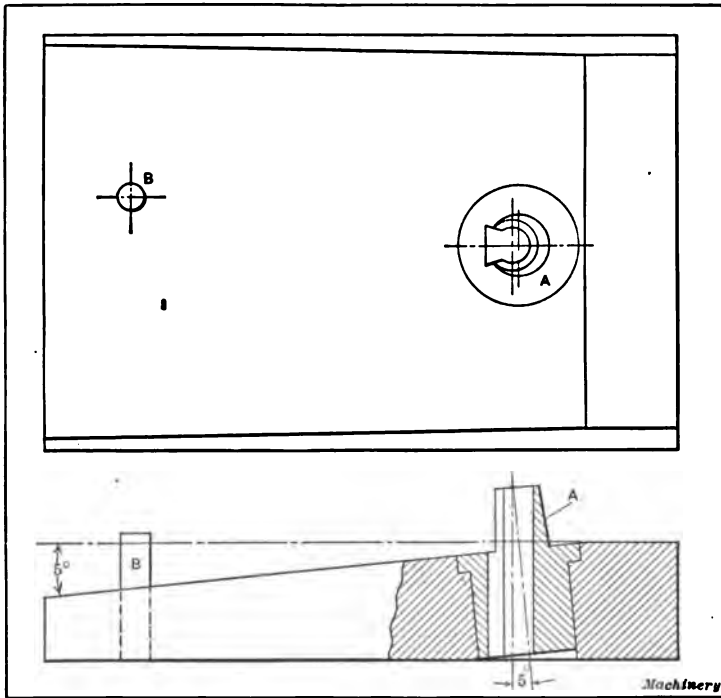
Fixture for Holding Bicycle Crank while Broaching Keyway
